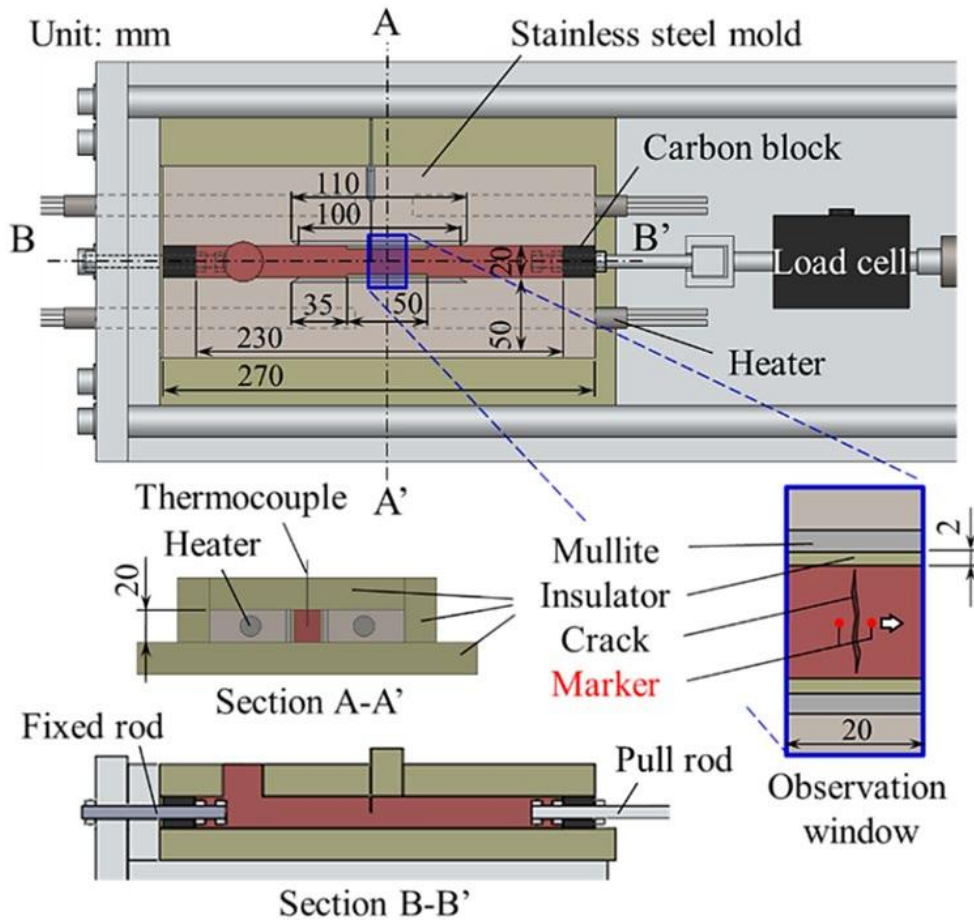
Dimensions in-house developed tensile test device [3].
